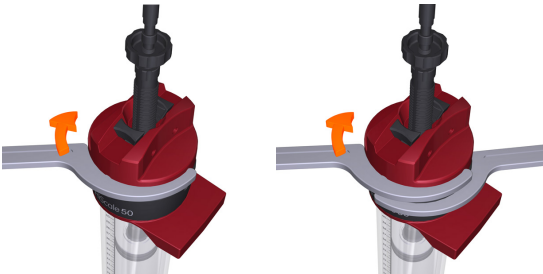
Using one spanner wrench, or two, to turn the end cap.
